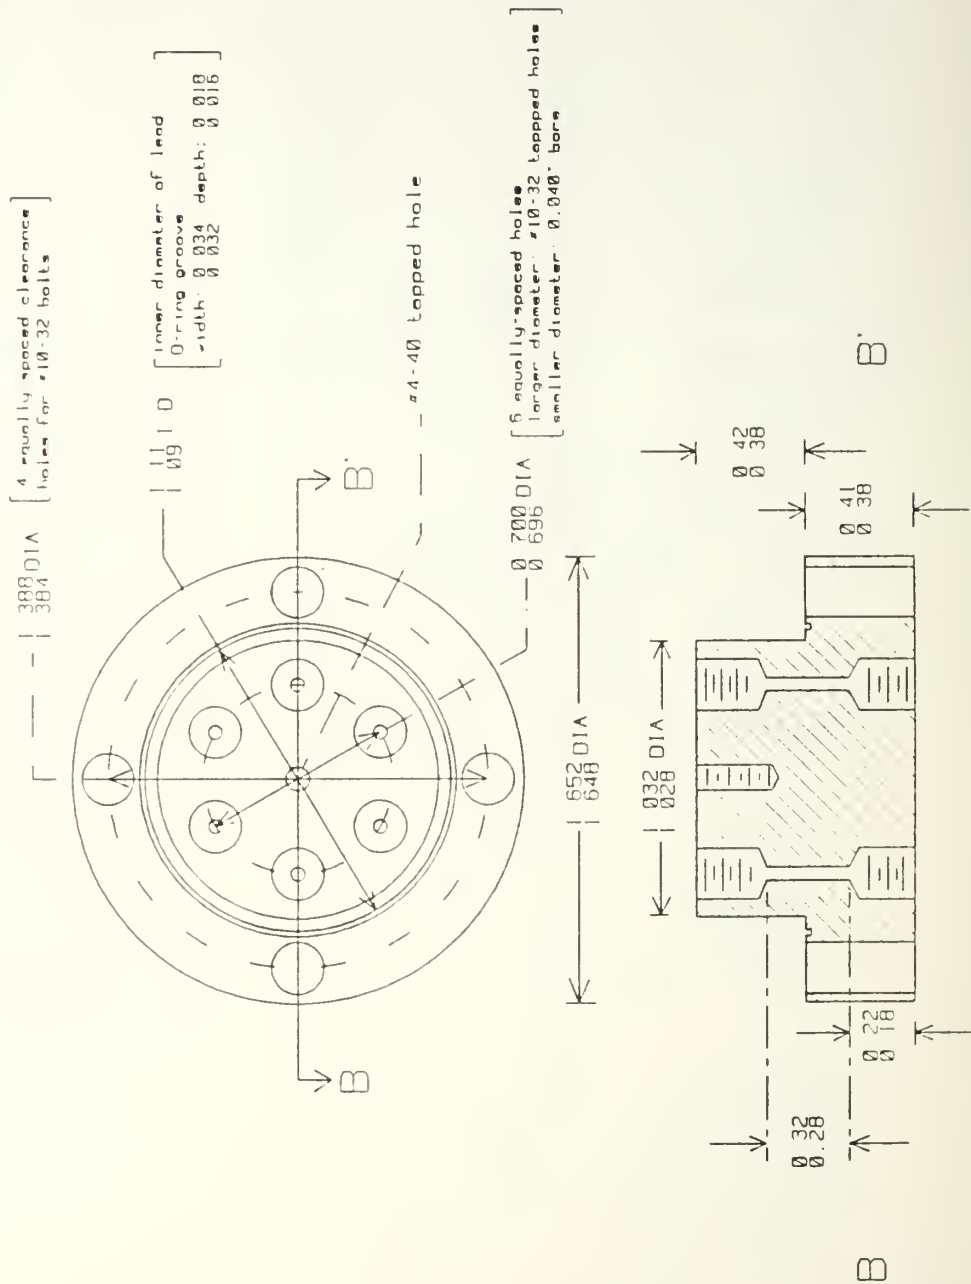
The Electronics Feed-through Plug without Connectors or Fittings in Plane and Section Views
